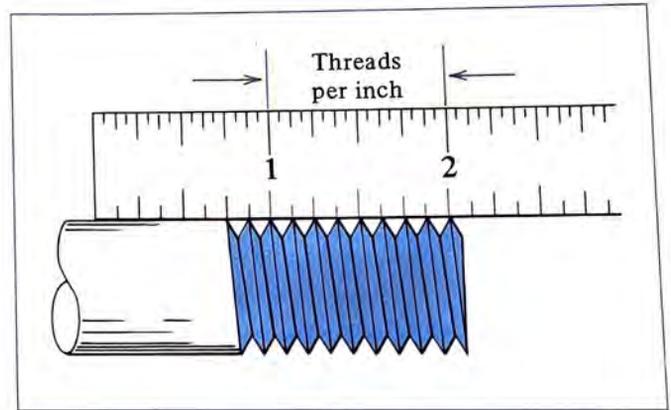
Using a Steel Rule to Measure the Number of Threads Per Inch
